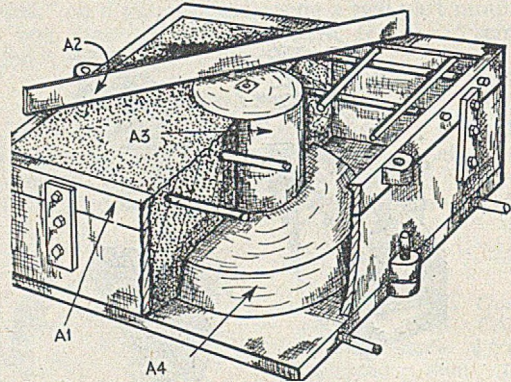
Top Half of the Winding-drum Mould; the Drum Section (A3) is dowelled to the Cover-core Print (A4) and this latter, in turn, to the Pattern-plate.
